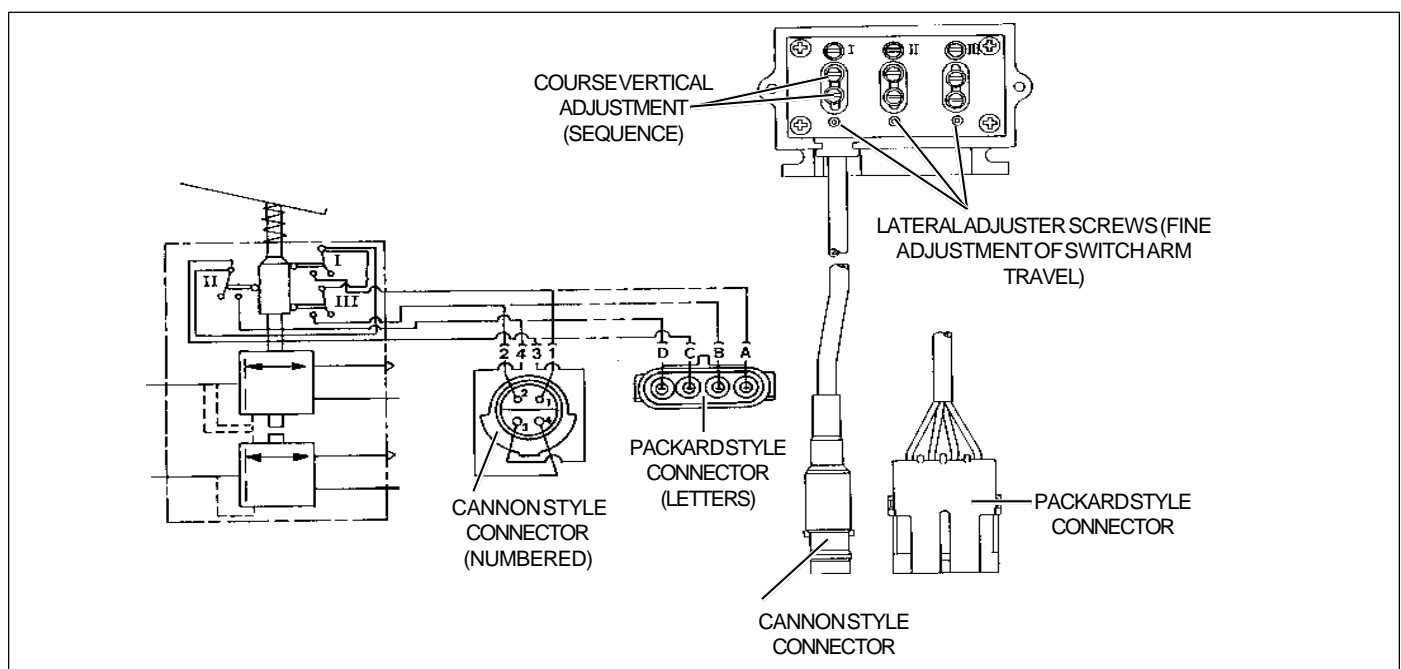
RETARDER BRAKE VALVE SWITCH ADJUSTMENT
